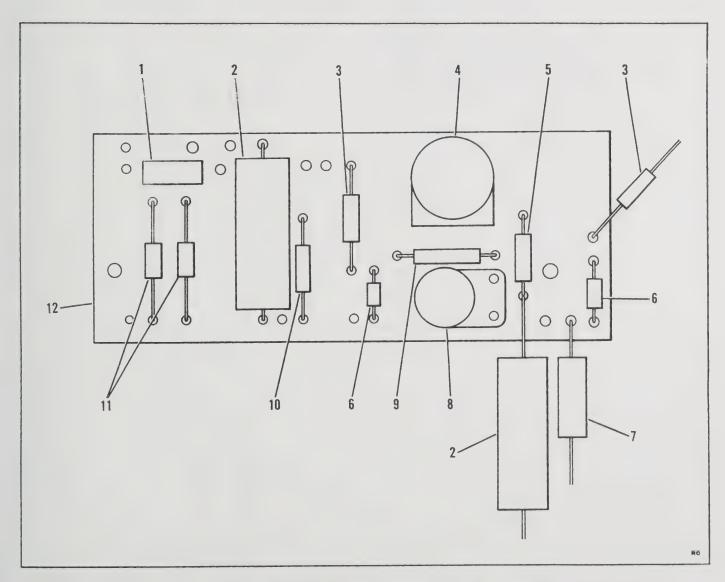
Printed Circuit Board Assembly, Part No. 400D-75F
